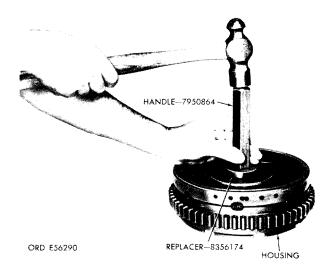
Installing high-range clutch housing bushing using handle 5120-316-9182 (7950864) and replacer 5120-572-8658 (8356174).
